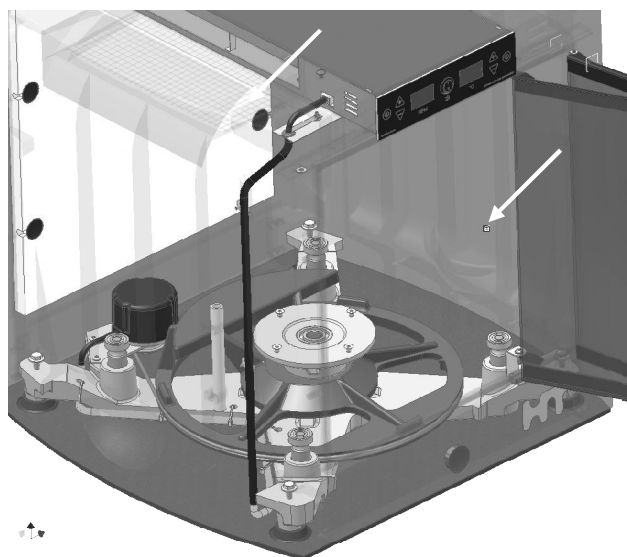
Removing the 4 large screws which hold the housing onto the shaker.
